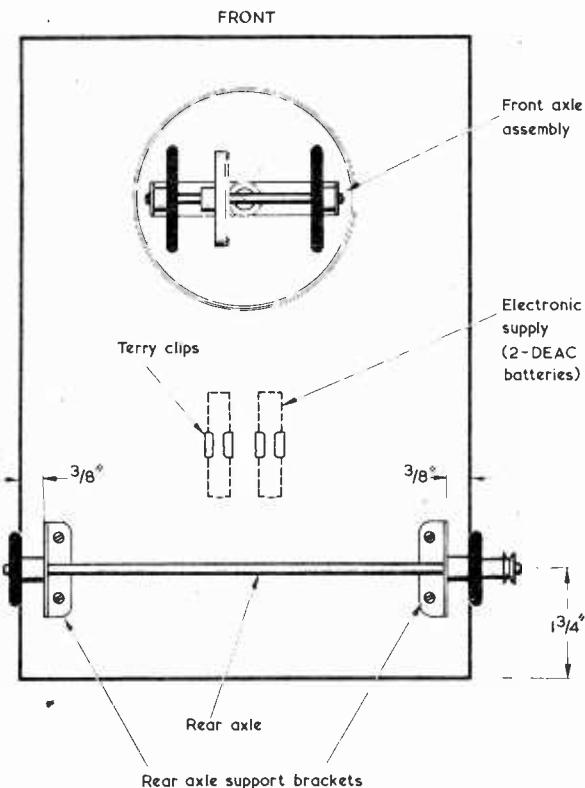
Underside view, illustrating the position taken up by the rear axle assembly. Also shown are two Deac batteries. These will later be used to power the electronics
